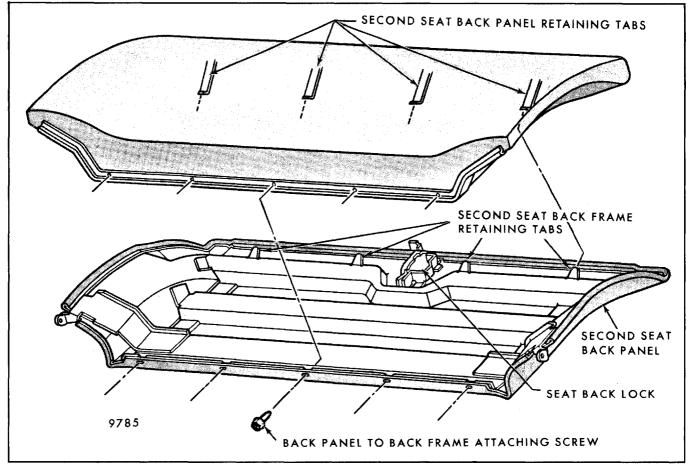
Folding Second Seat Back Trim Assembly Installation - A Styles
